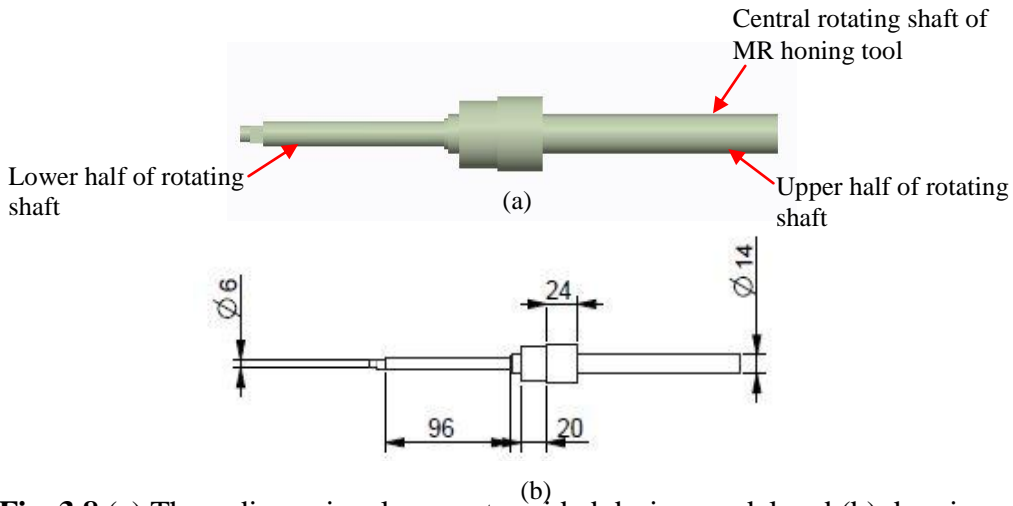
(a) Three dimensional computer-aided design model and (b) drawing of the central rotating shaft of the magnetorheological honing tool.
